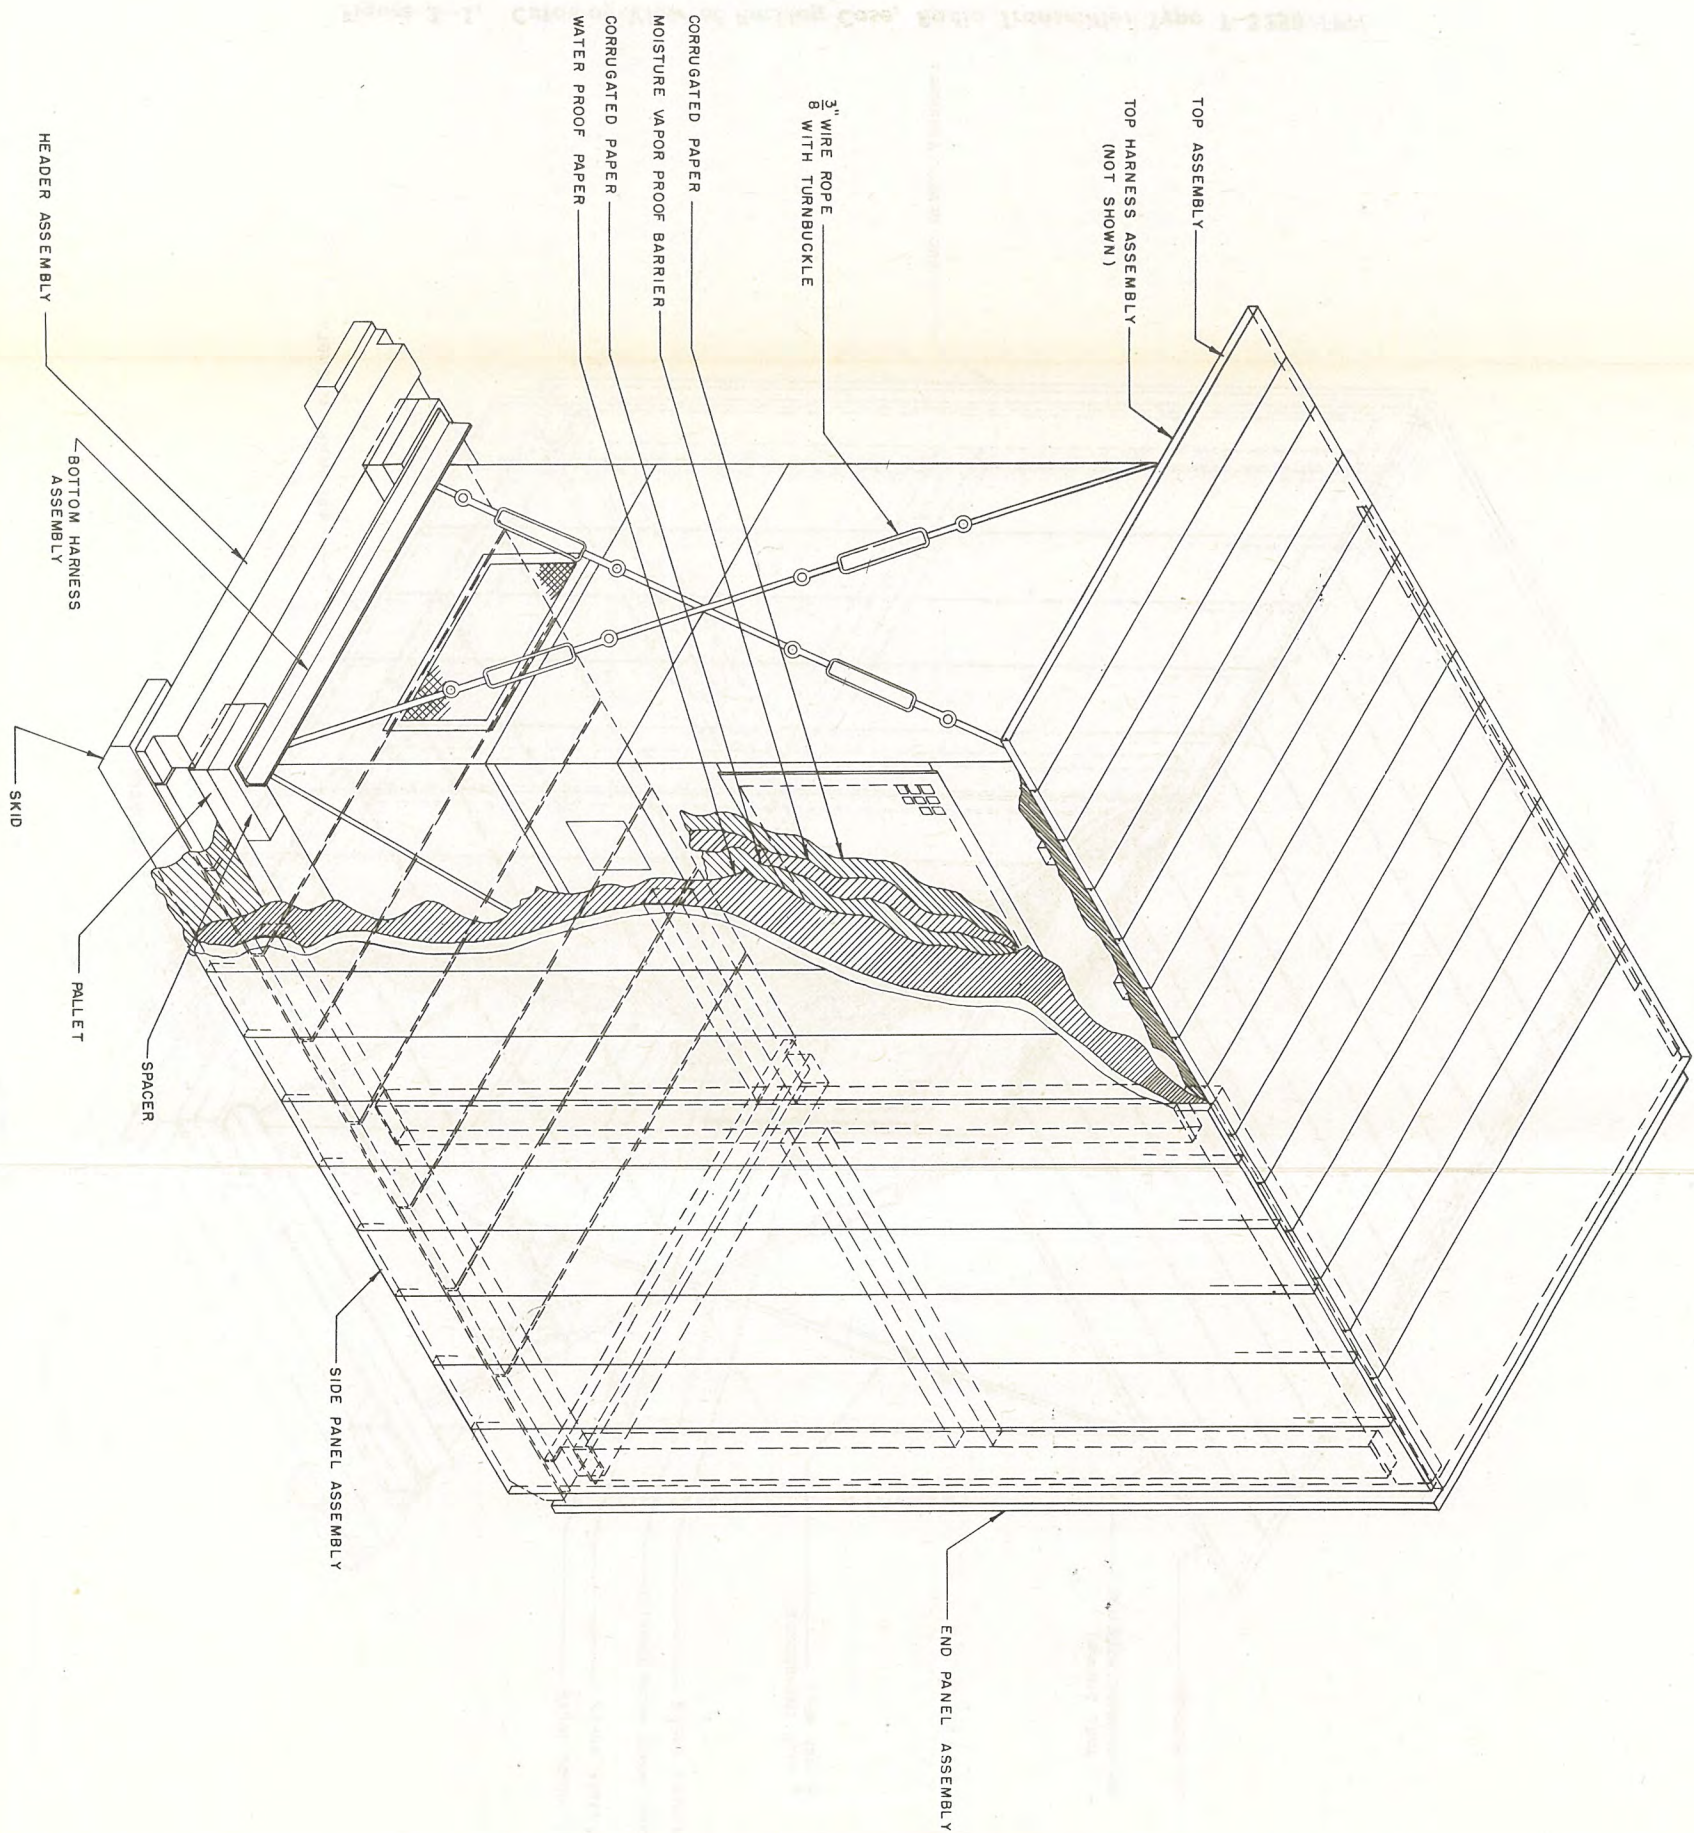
Cutaway View of Packing Case, Radio Transmitter Type T-325B/FPN
